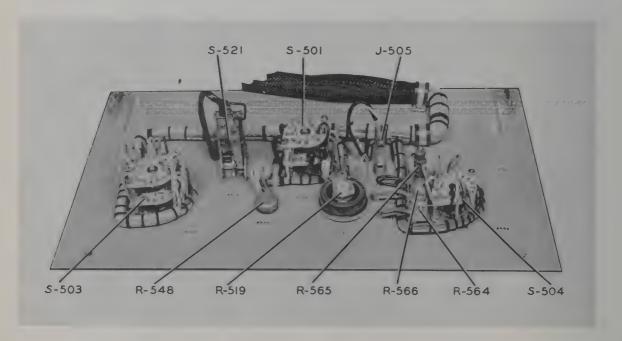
Radio Transmitter T-454/FRT-26, Lower Control Panel, Rear View.
